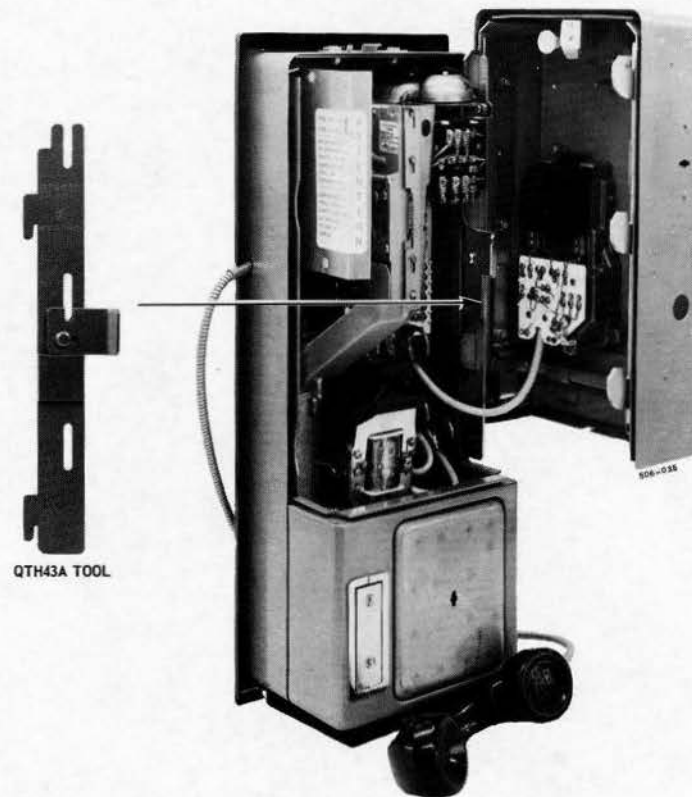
QSD400A1 or QSD2400A1 Coin Telephone Set Showing Cover Unit Assembly Removed and Supported by QTH43A Tool
